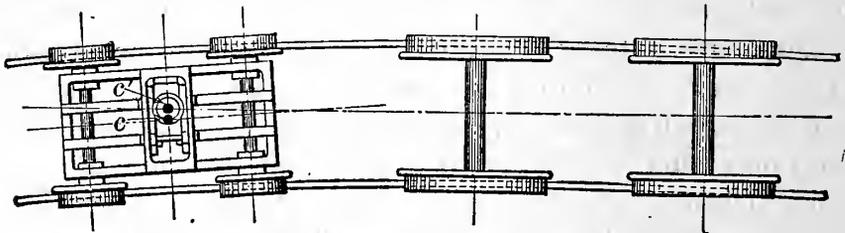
FOUR-WHEELED TRUCK—SHIFTING CENTER.
